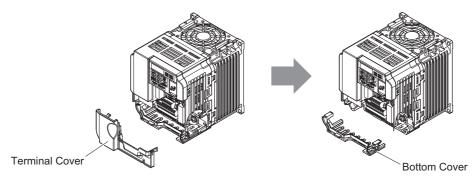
Remove the Terminal Cover and Bottom Cover on an IP20/Open-Chassis Drive (Models CIMR-V□BA0006B to BA0018B; 2A0008B to 2A0069B; 4A0001B to 4A0038B)
